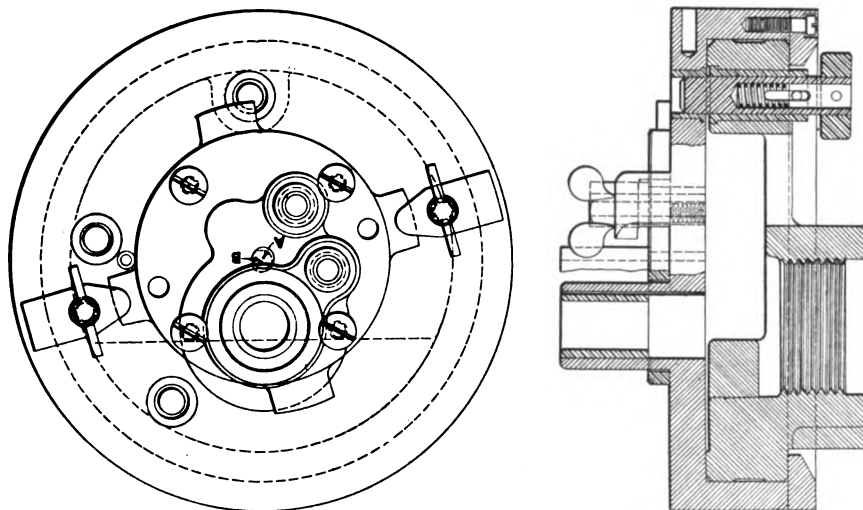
DETAILS OF FIXTURE FOR BORING GEAR CASES
